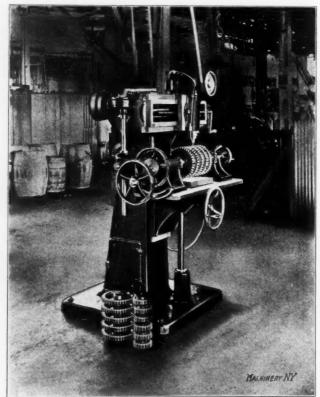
Chamfering the Teeth of Spur Gears in the Winton Factory
